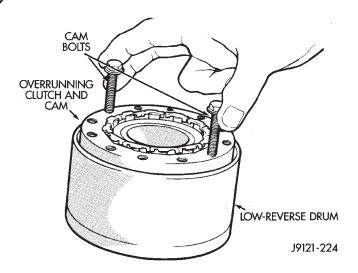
Removing Overrunning Clutch From Low-Reverse Drum
